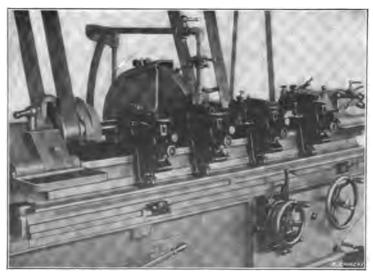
Grinding Machine equipped with Four Universal Back-rests
